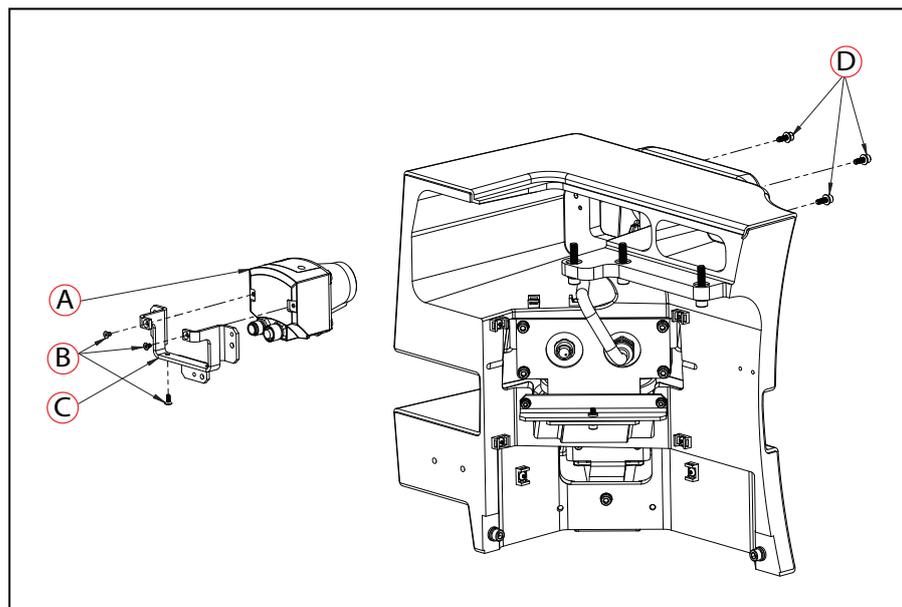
(A) Side Laser, (B) M3 Screw, (C) Laser Bracket, and (D) M4 Screw
